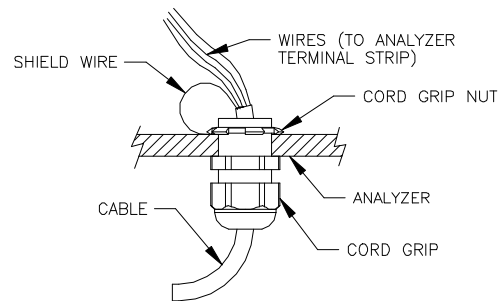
Sensor or Interconnect Cable Bare Shield Wire Connection
